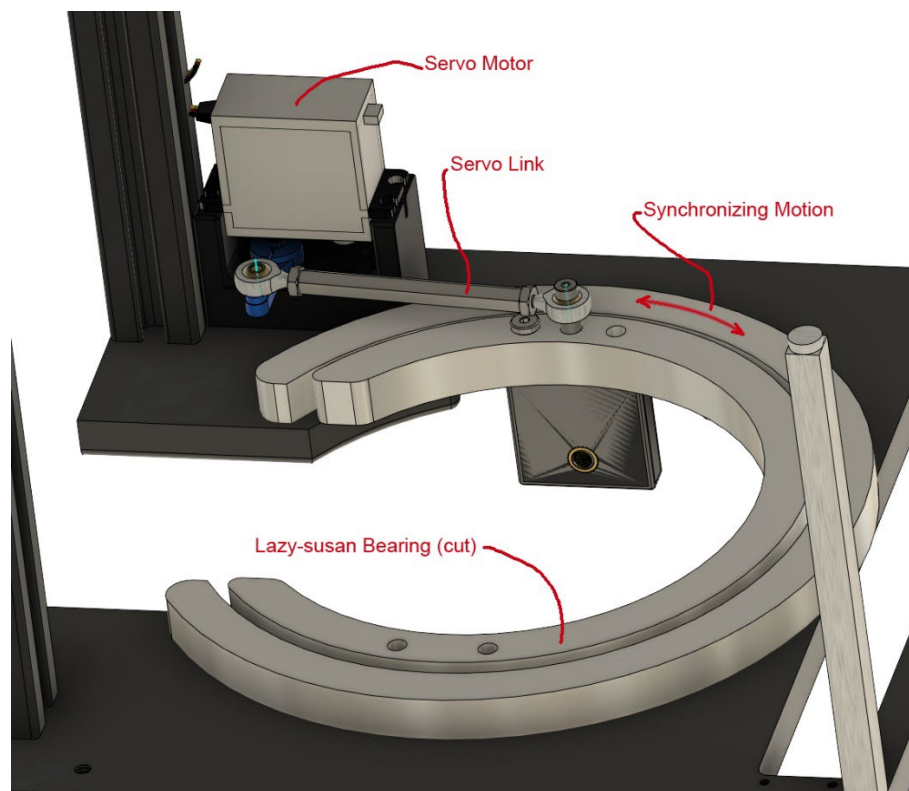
ServoSync Mechanism with Thin Ball Bearing Design
